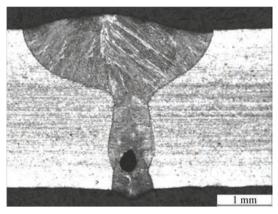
Structure of the welded joint of SUS304 steel produced by laser-plasma method, with pore formation in the weld lower part
